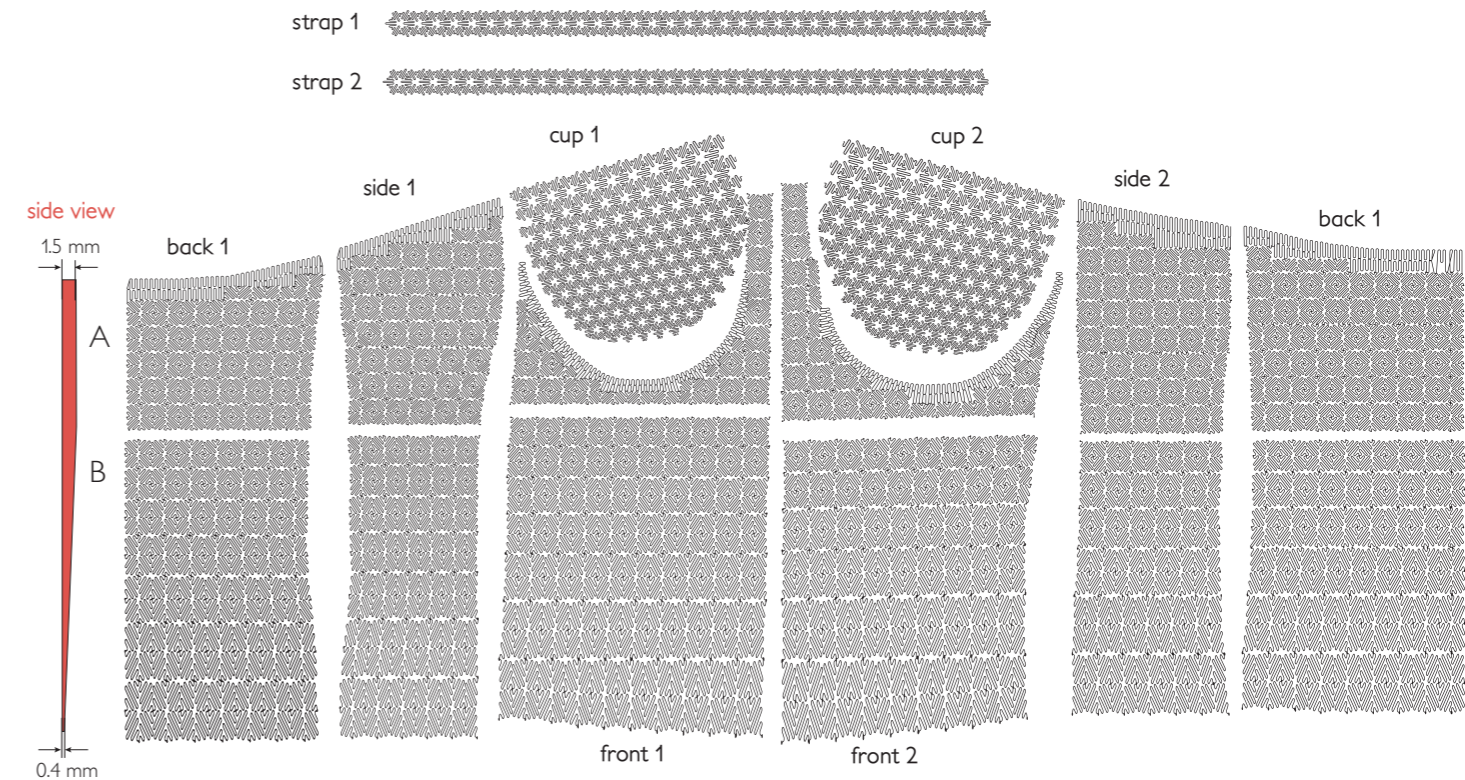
EXPLODED VIEW OF THE FLAT PATTERN
